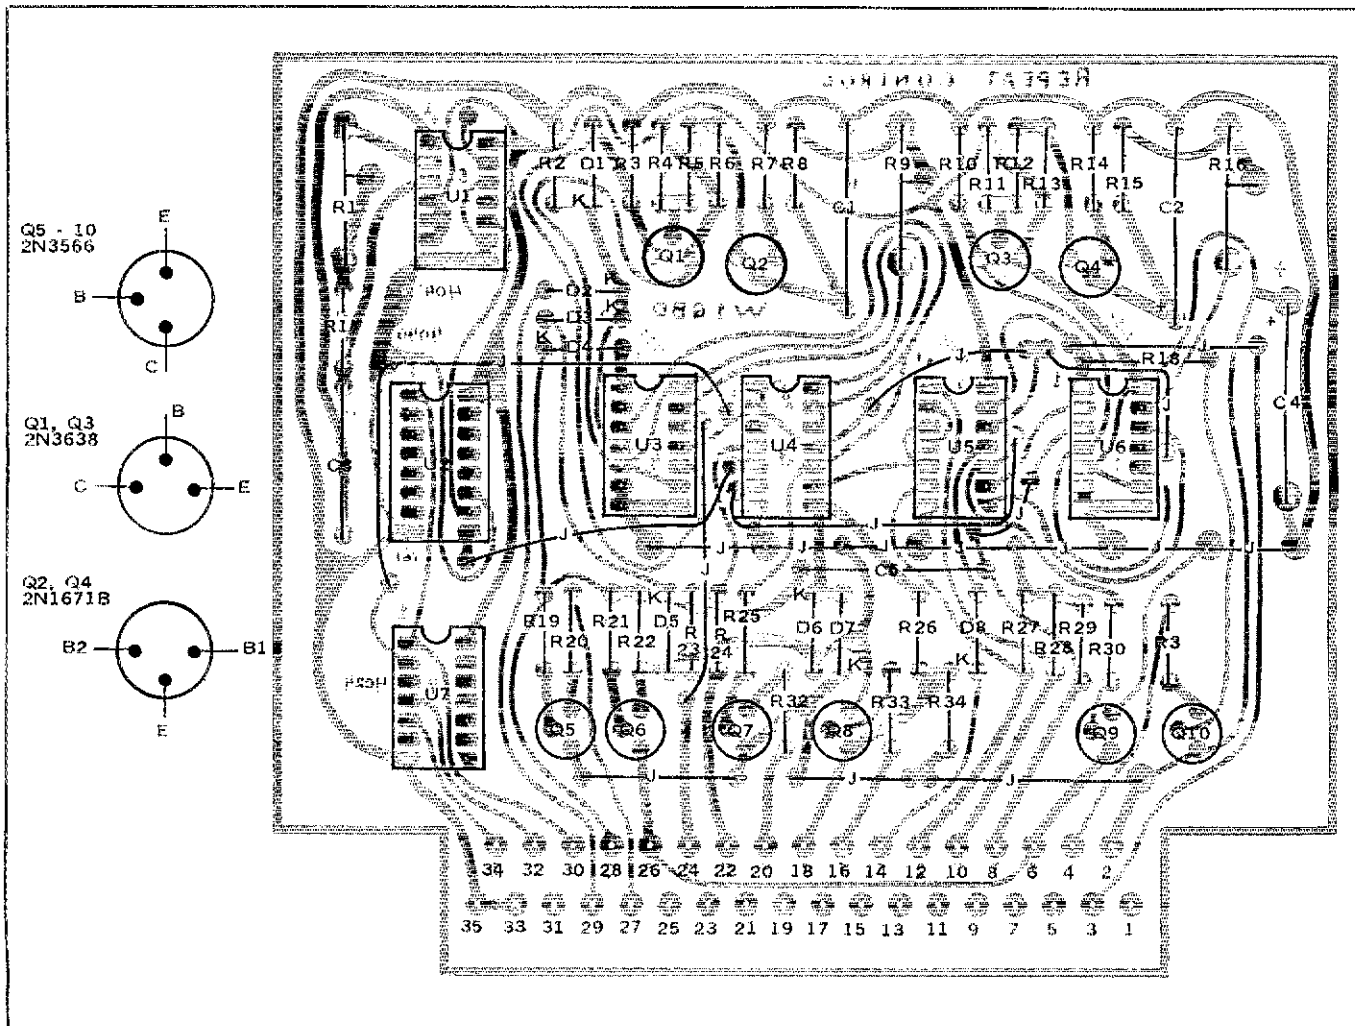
Parts-placement guide for the printed-circuit board, which is shown from the component side. The etching pattern for the board appears in the "Hints and Kinks" section of this issue. J indicates wire jumpers, and K indicates the cathode of a diode.
